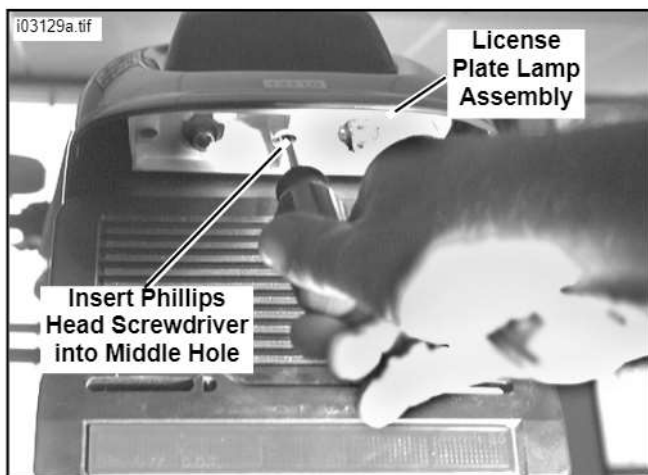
Removing the Tail/ Stop Lamp Assembly (FXSTD Models)
